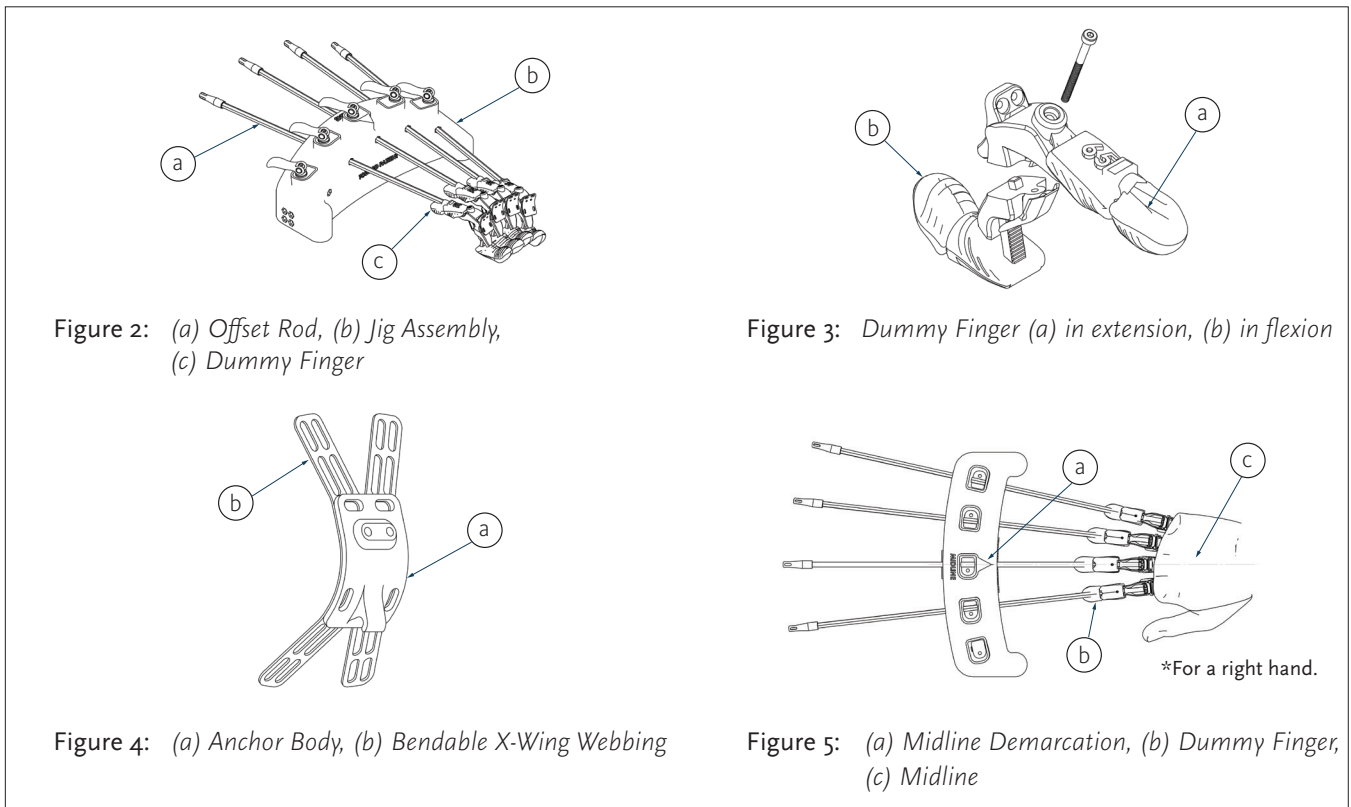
(a) Offset Rod, (b) Jig Assembly, (c) Dummy Finger
